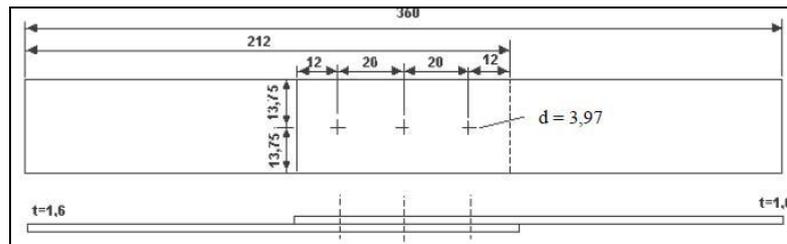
Dimensions of the solid riveted joint’s model [mm]
